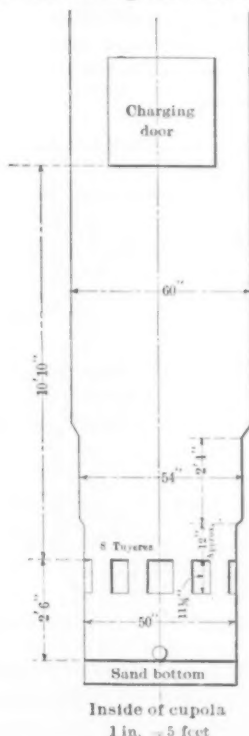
SHOWING INTERNAL DIMENSIONS OF CUPOLA
